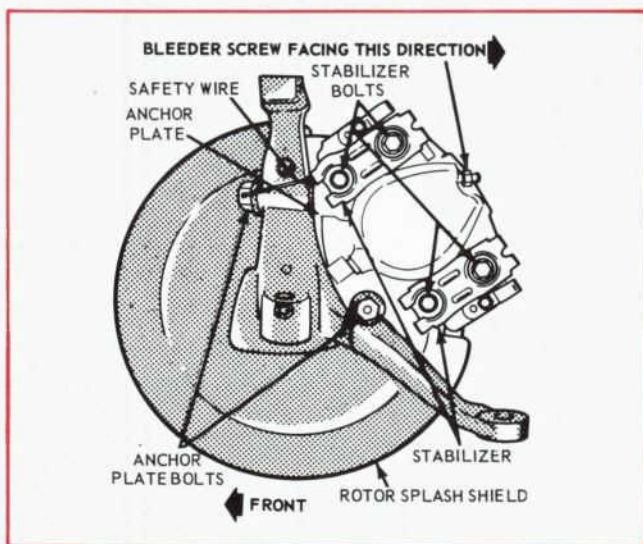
A rear view of the floating caliper disc brake as it appears when installed to the anchor plate and wheel spindle arm.
